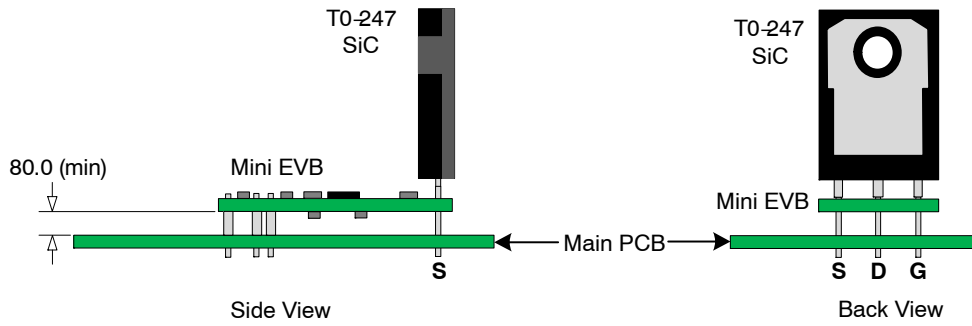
New PCB Design using Shoulder Pins (80 mil minimum mounting height)
